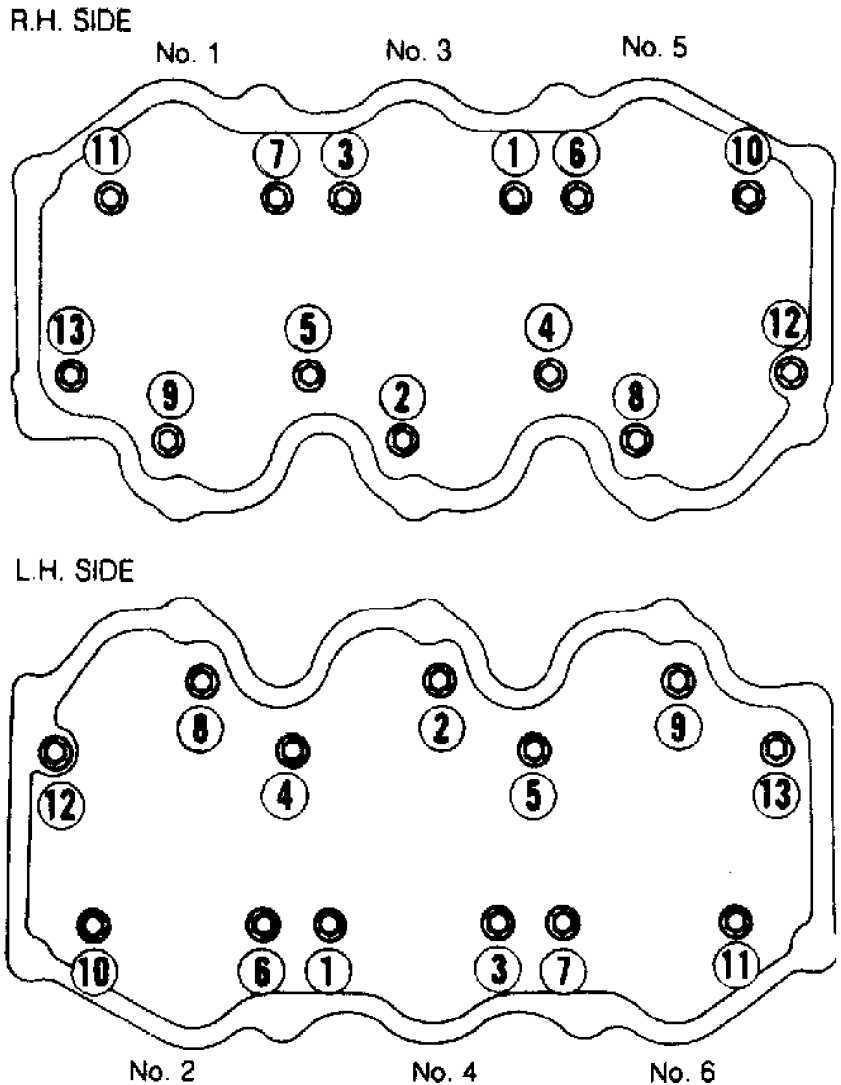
Cylinder Head Bolt Tightening Sequence
